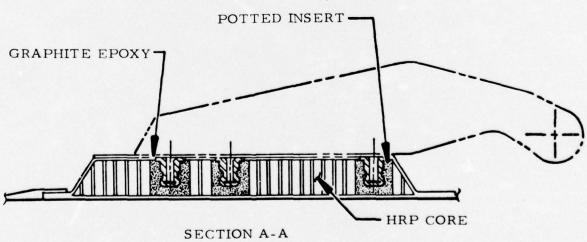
COMPOSITE SPOILER ASSEMBLY
